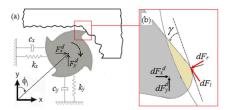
Dynamic milling with process damping. (a) cross section of a helical end mill, (b) flank-workpiece interaction.
